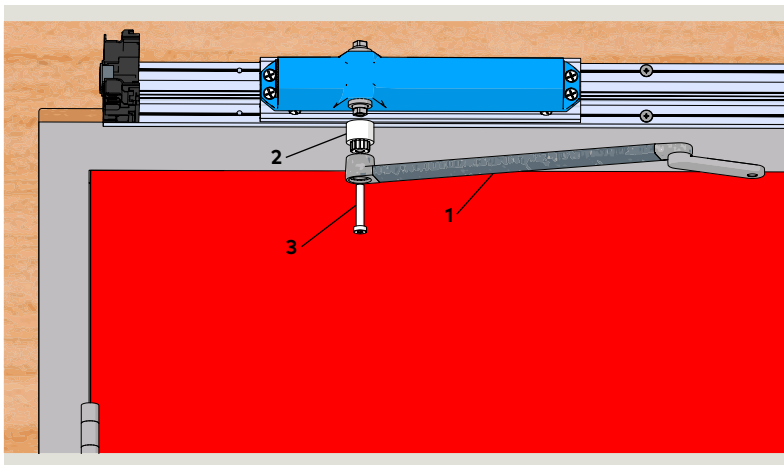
Closer adapter and closer assembled to backplate
